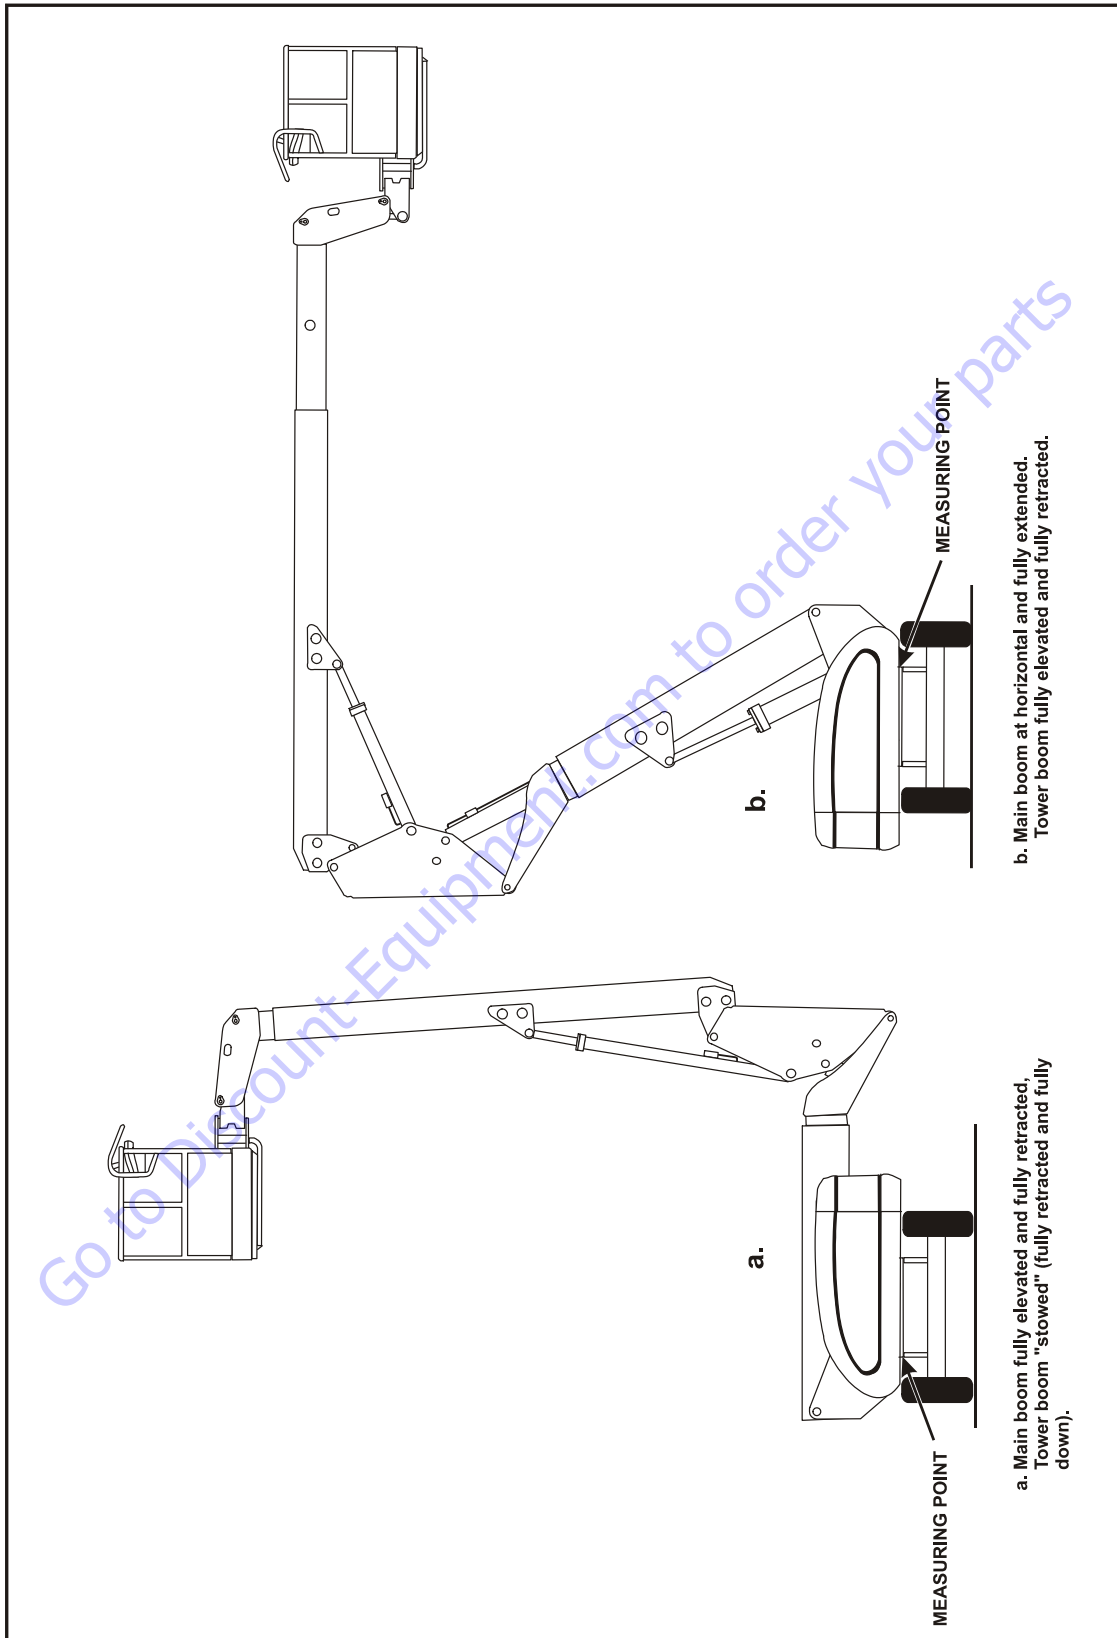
Swing Bearing Tolerance Boom Placement
